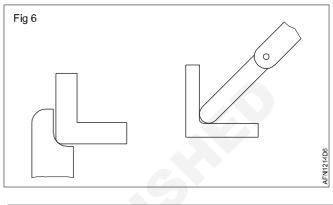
shows that the radius of the fillet and that of the external radius are smaller than the gauge.
